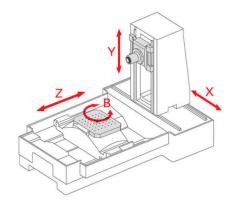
Schematic drawing of CNC machine, describing the axis of the CNC spindle to perform a cut or other function [67].
